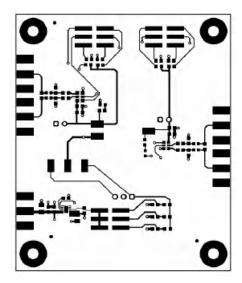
PCB Layout Example From LMK6 EVM - Top Layer
